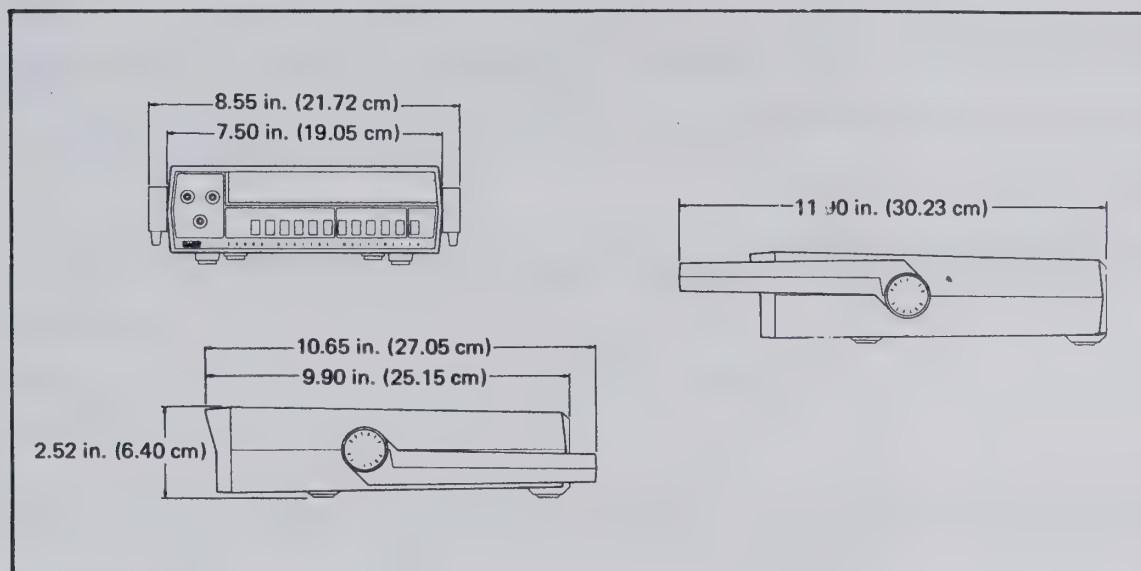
MODEL 8000A OUTLINE DRAWING.
